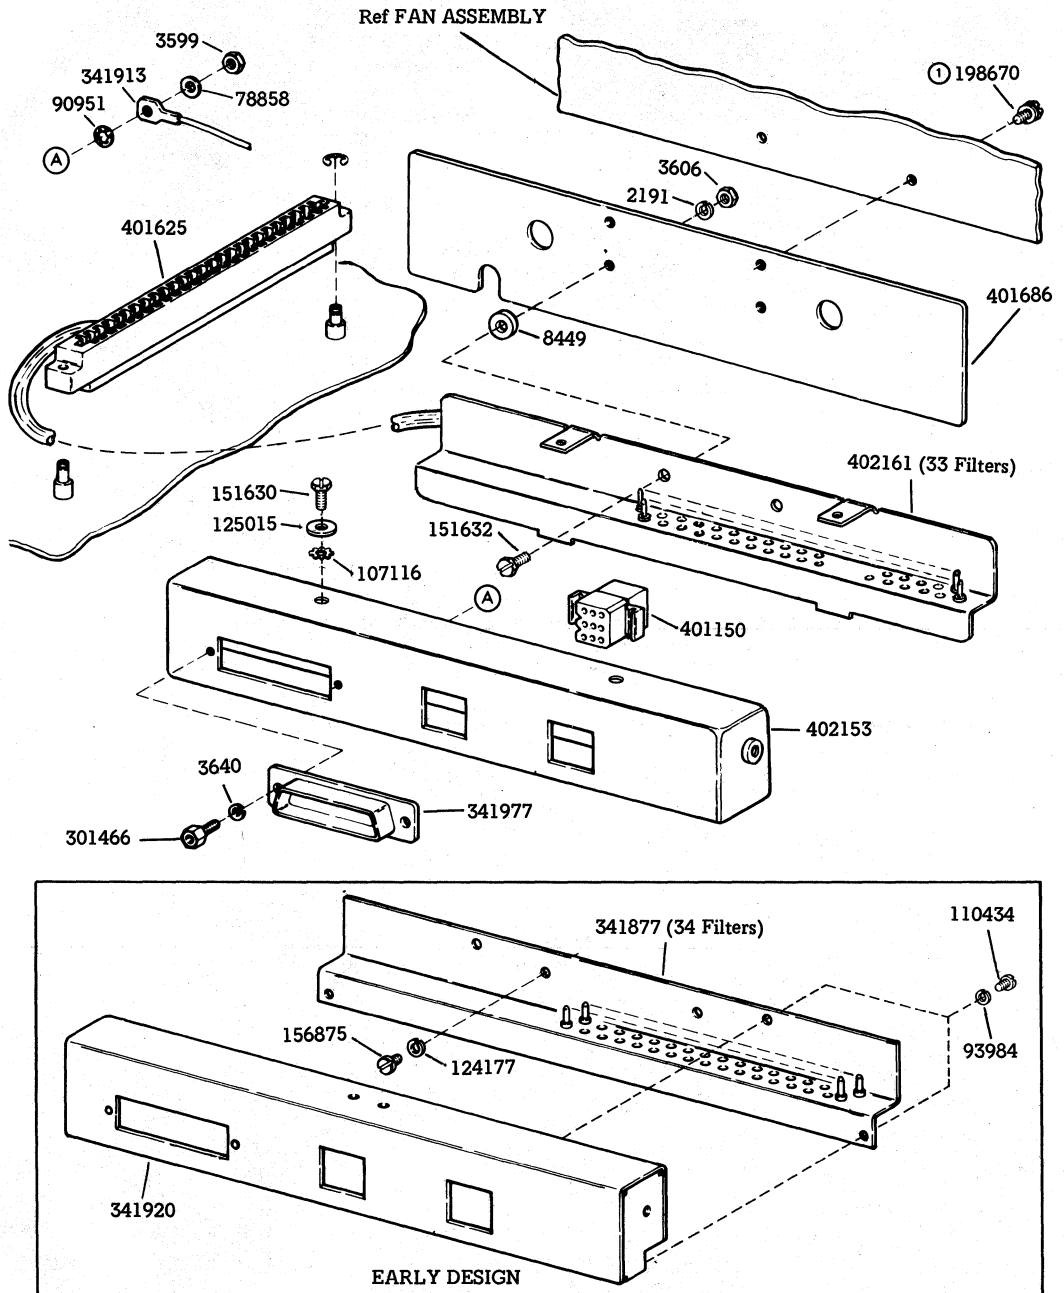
KDP Module Assembly for 40CAB901/AG Cabinet
